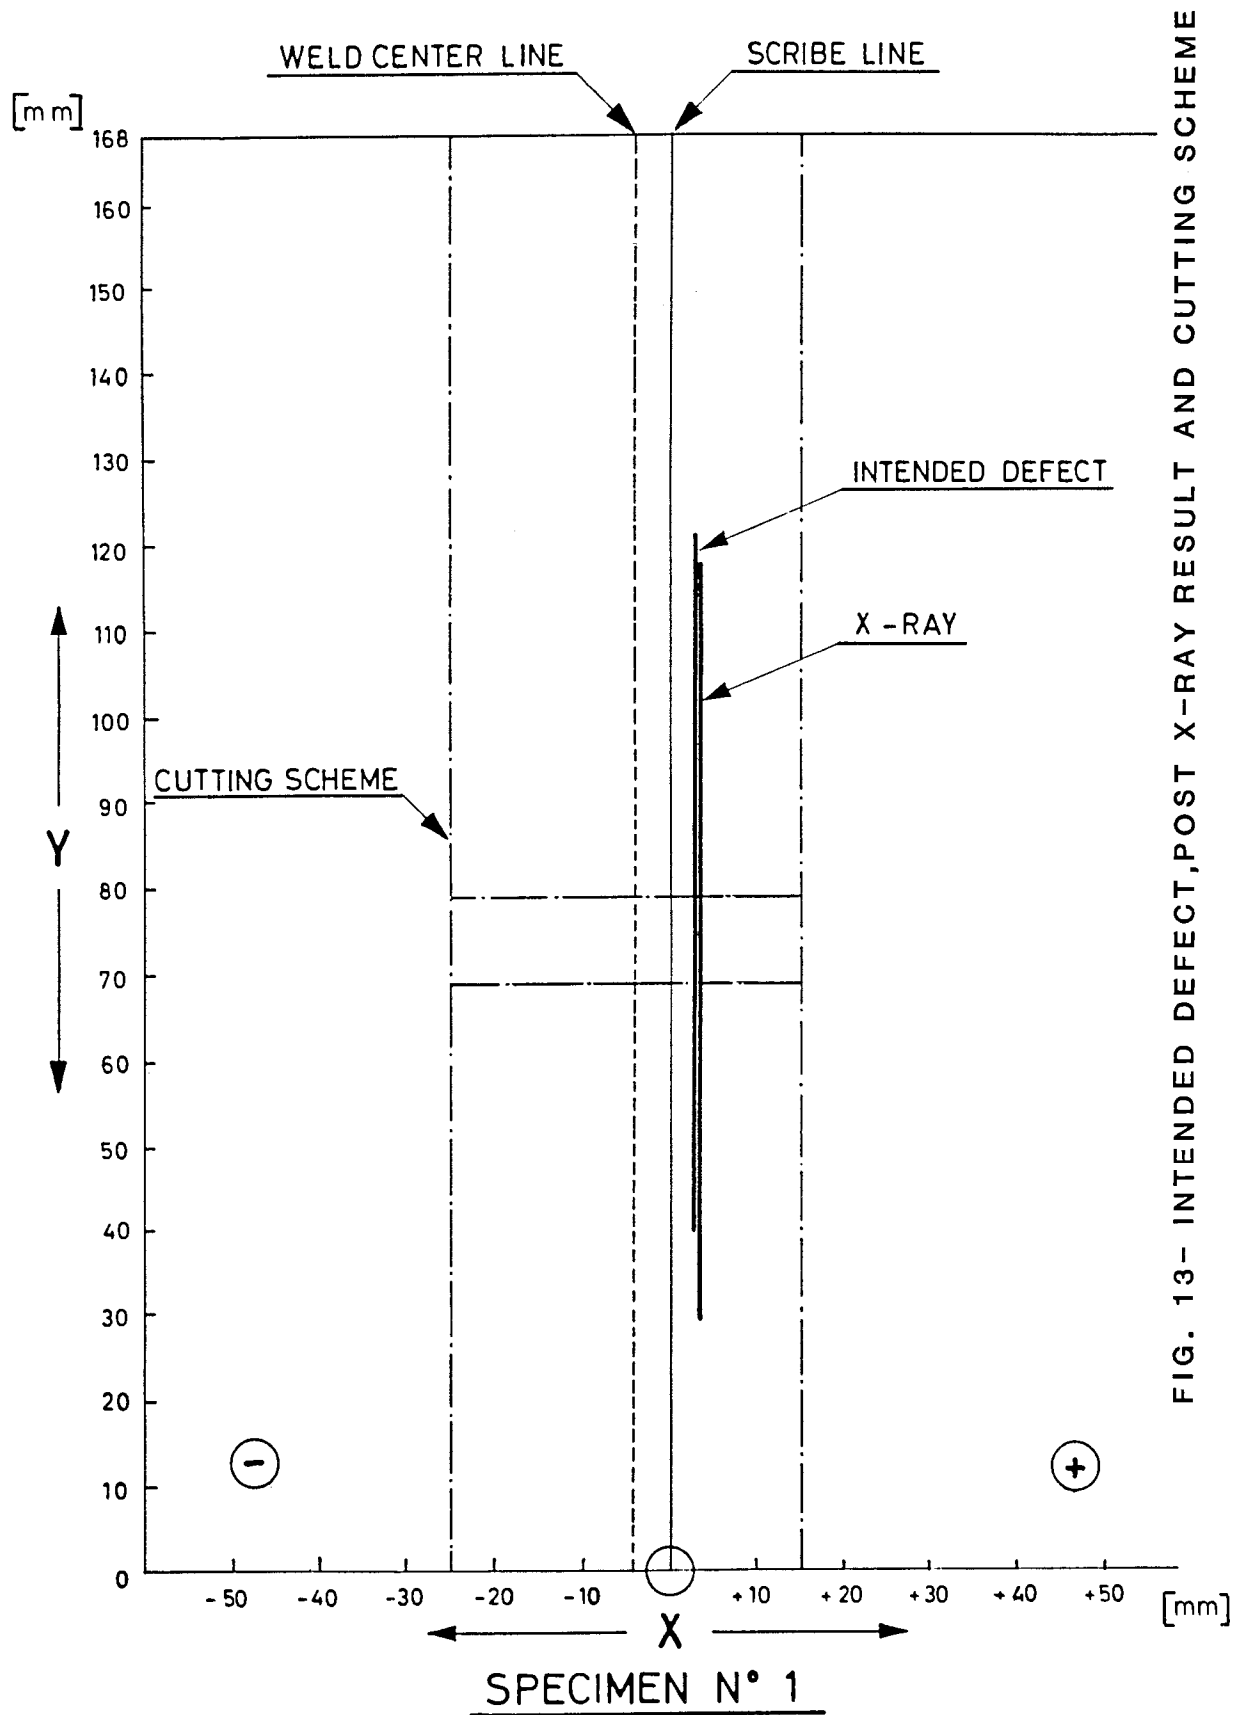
INTENDED DEFECT, POST X-RAY RESULT AND CUTTING SCHEME OF SPECIMEN N° 1
